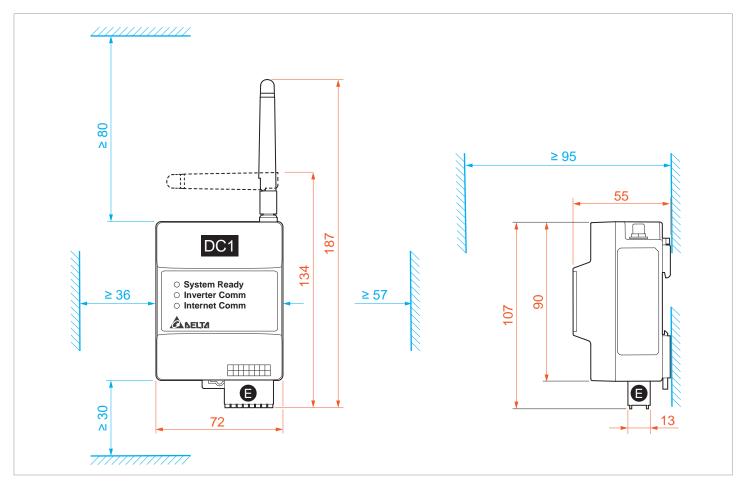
Dimensions and Mounting distances DC1 data collector (in mm)
